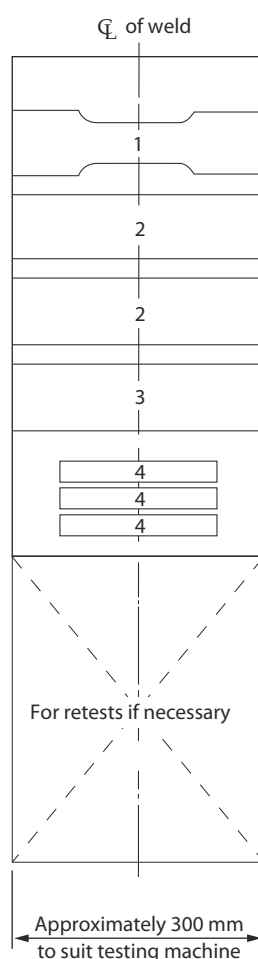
Routine weld tests - Test specimens for Class 2/2 and Class 3
